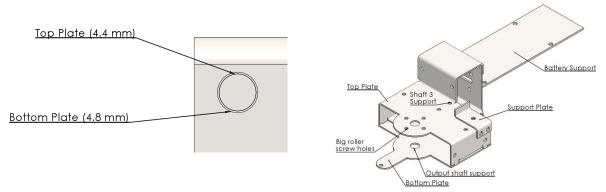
(Left) Inner and Outer holes in the sheet metal plates (Right) Isometric view of the sheet metal structure
